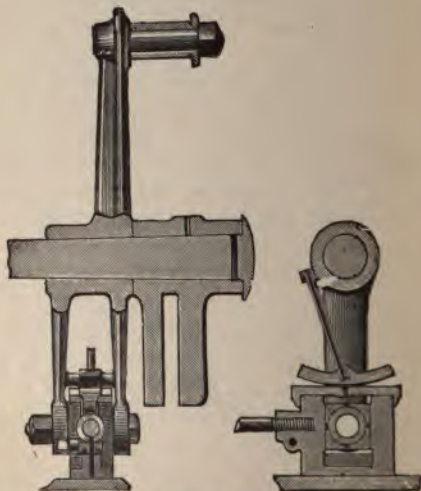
WEDGE OF STRAIGHT-LINE JOURNAL BEARING.
